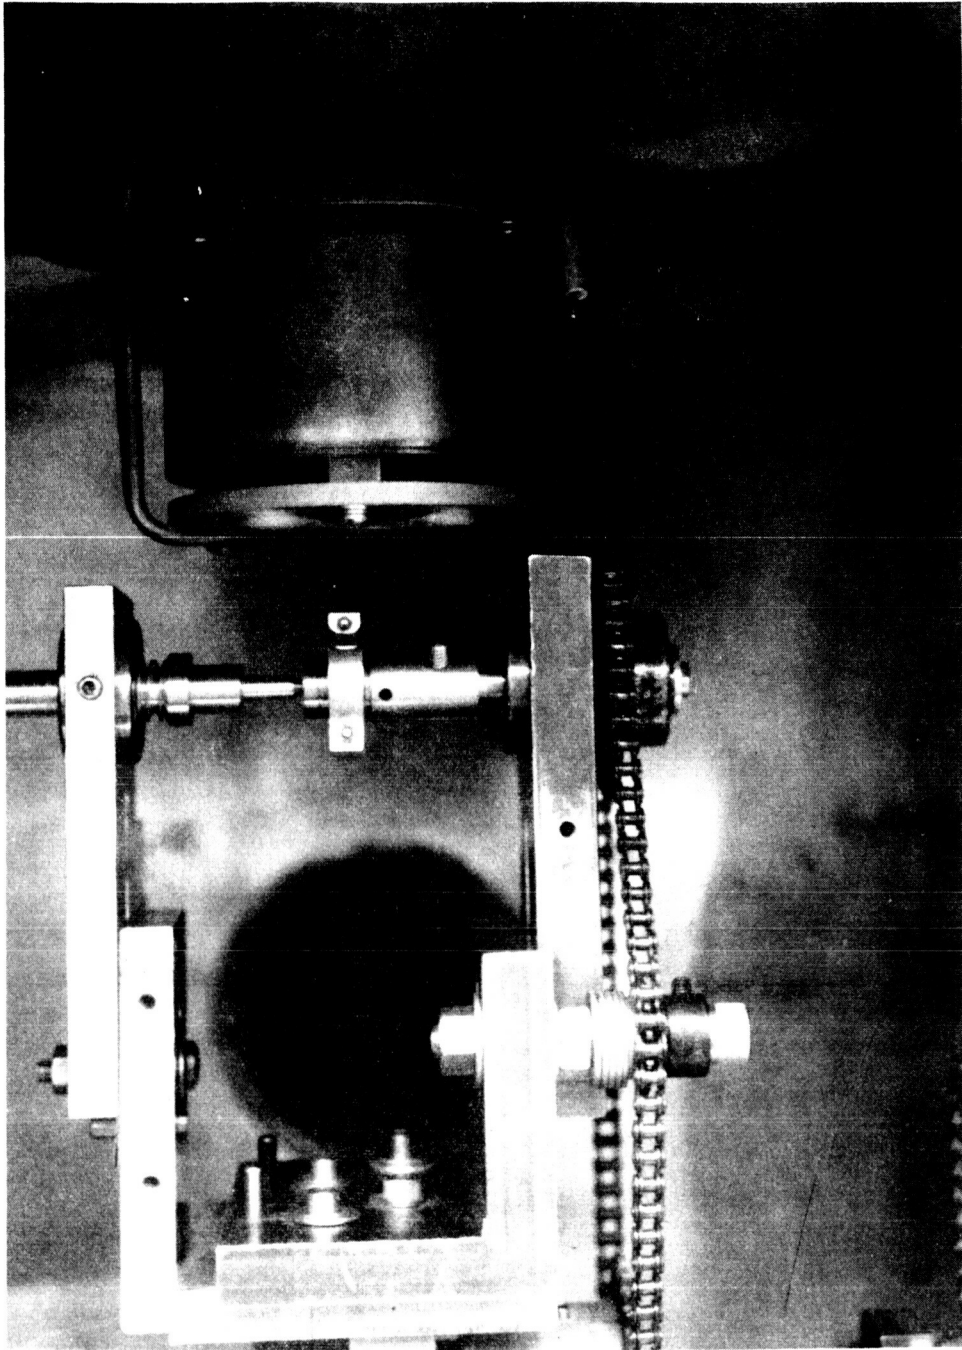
Electron Beam Welding of an Emitter to a Sleeve
